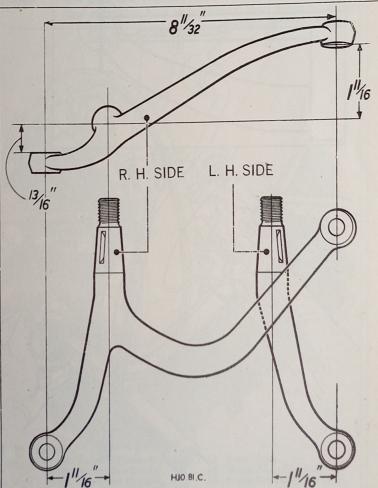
Swivel arms, showing dimensions for checking actual setting of each for correct steering geometry.
